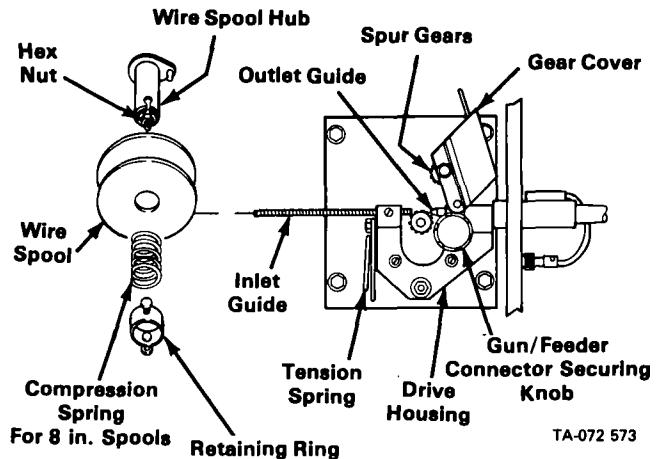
Wire Spool Installation And Welding Wire Threading
